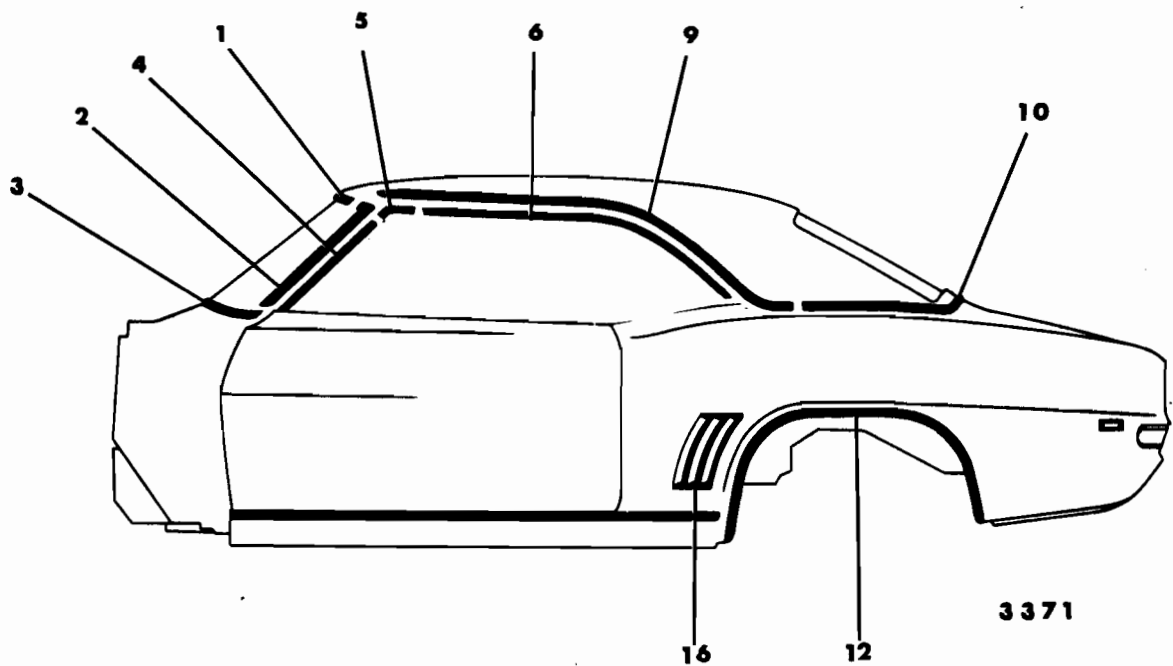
Chevrolet "F-37" Style ("67" Style Similar)
